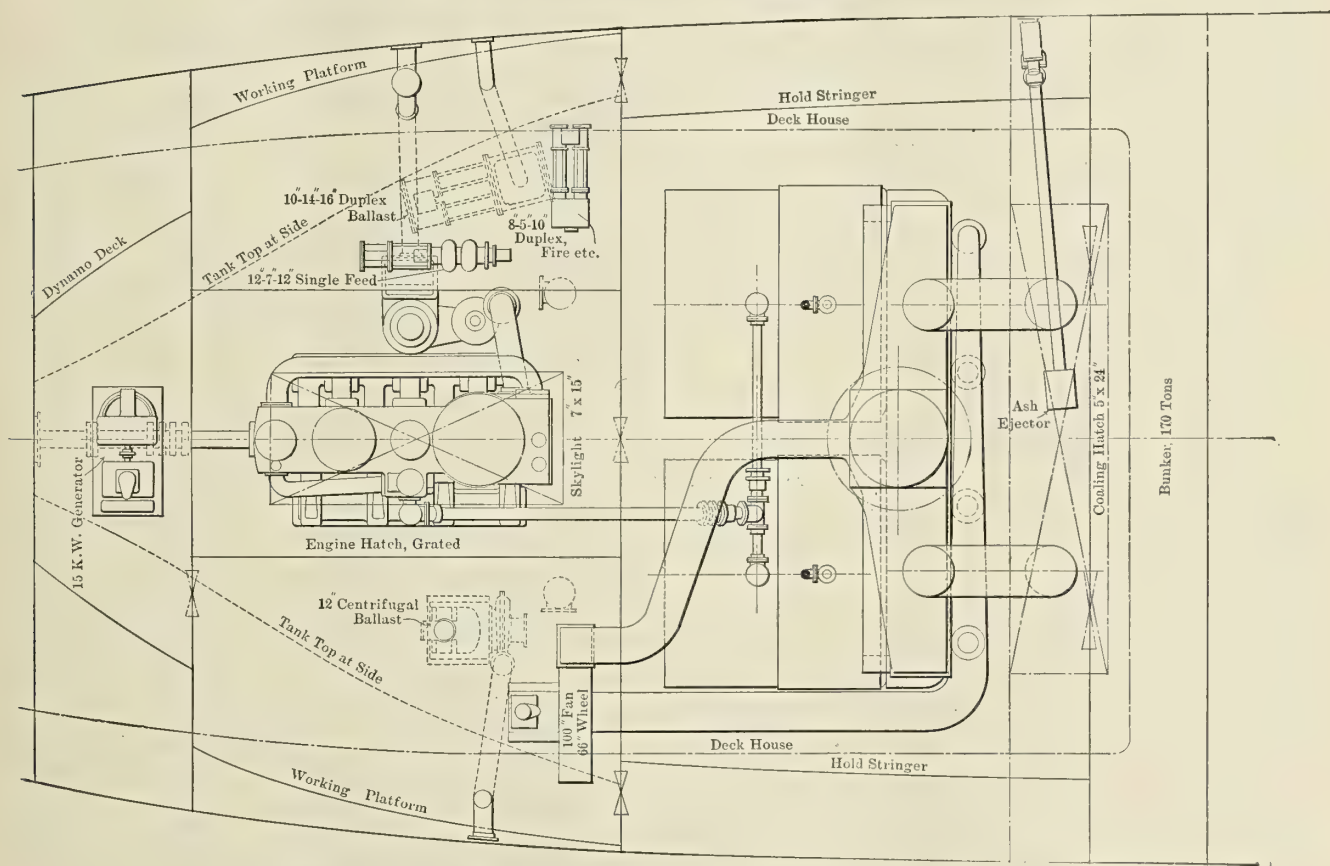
PLAN OF 1,000 HORSEPOWER STEAM PLANT; TRIPLE-EXPANSION ENGINE; TWO SCOTCH BOILERS.
